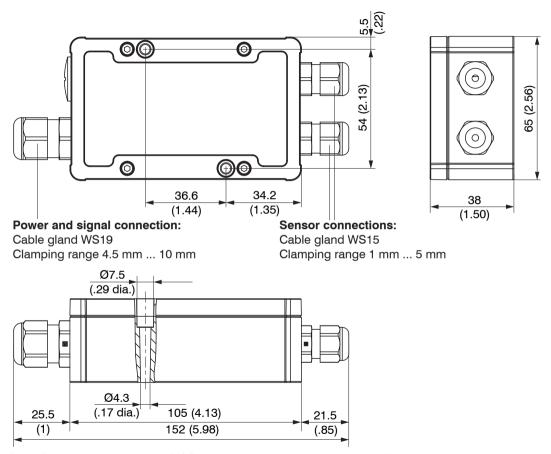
Dimensional drawing of MSC7802 controller, dimensions in mm (inches)
